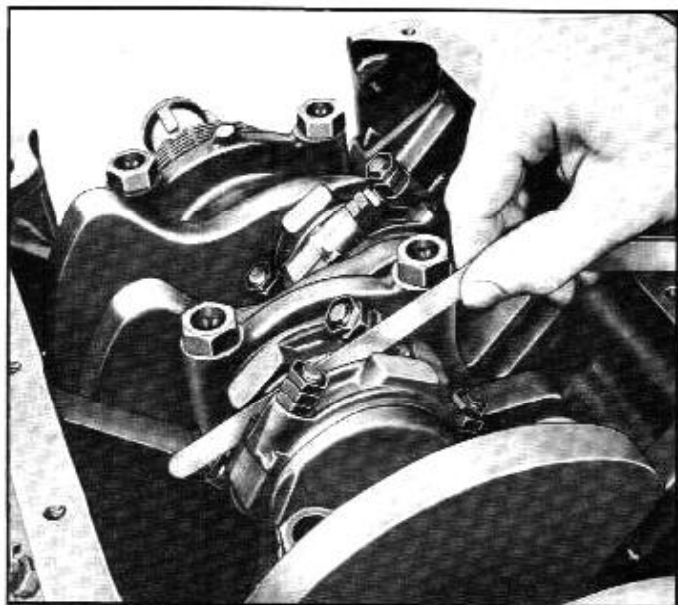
A-114—Checking Connecting Rod Side Clearance has been fitted.
